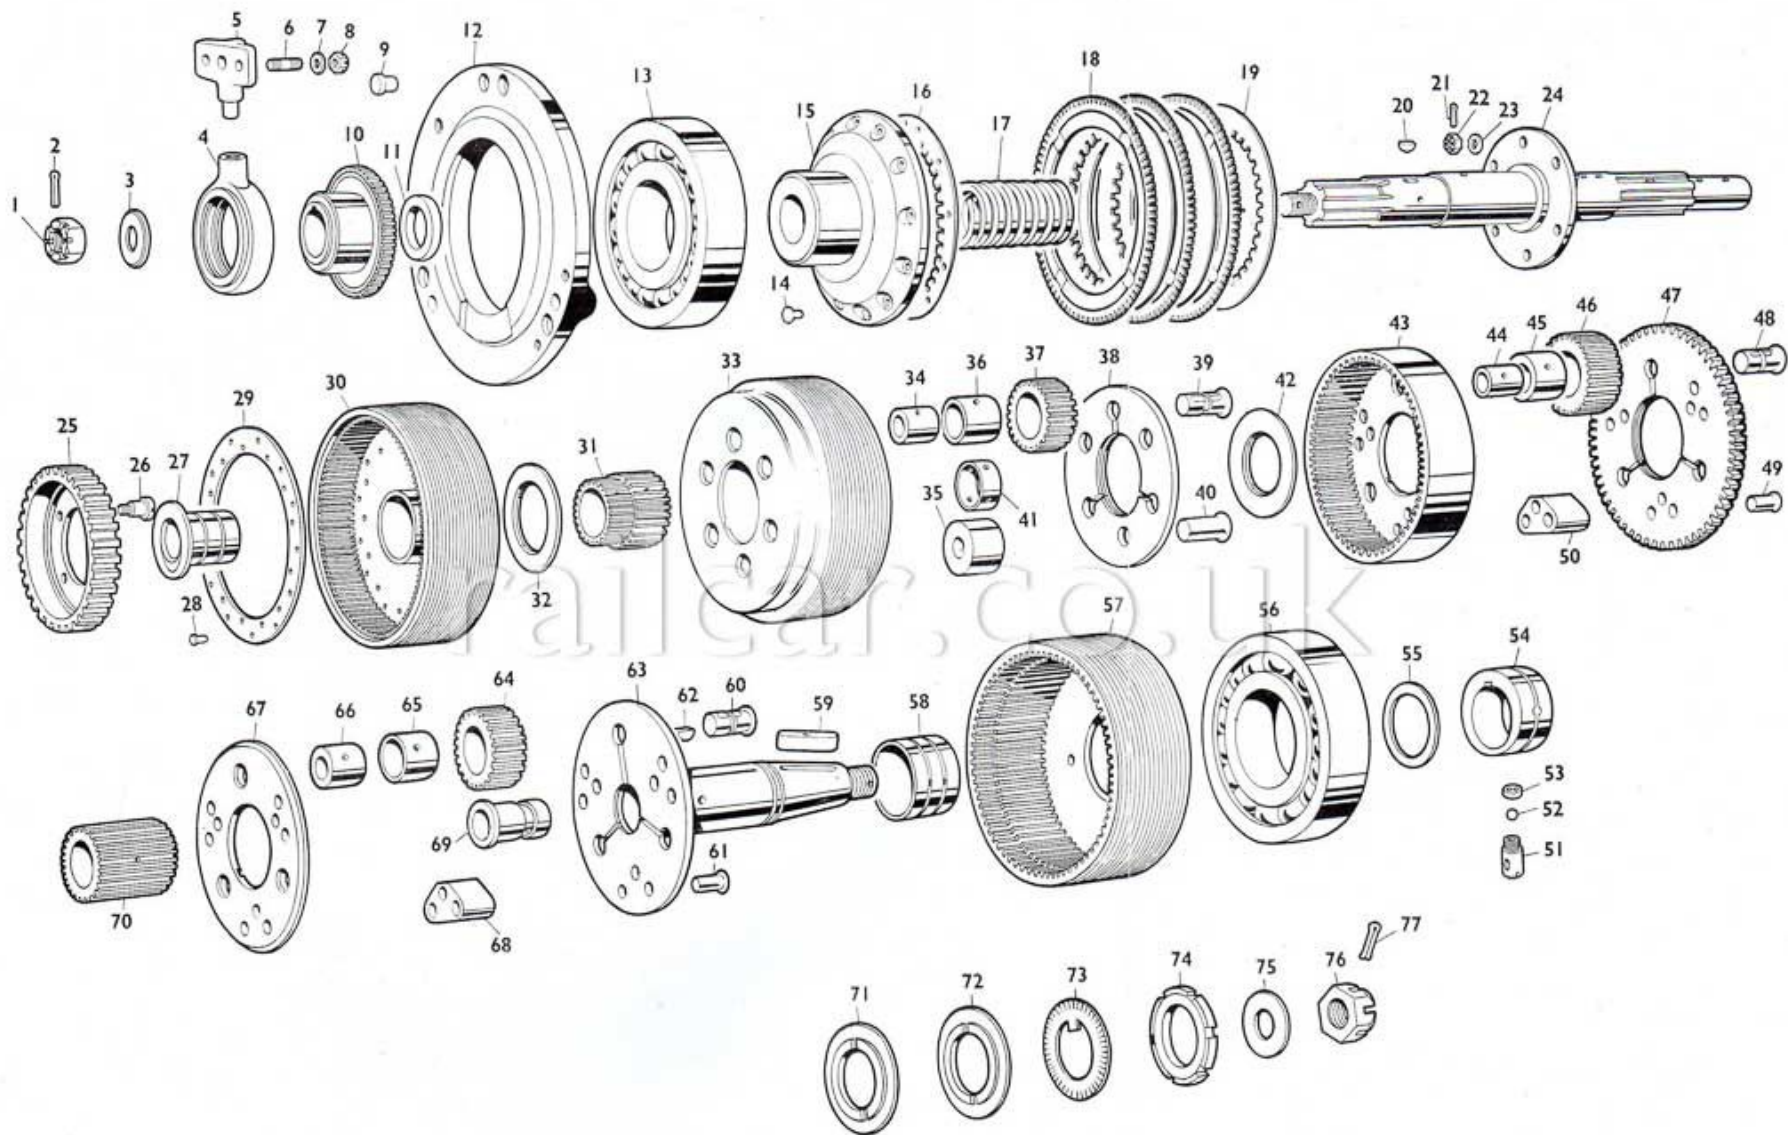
EXPLODED VIEW OF RUNNING GEARS
